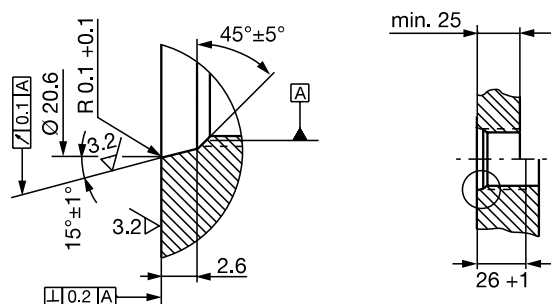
Mounting hole 3/4"-16UNF per SAE J475 O-ring 15.3x2.4
